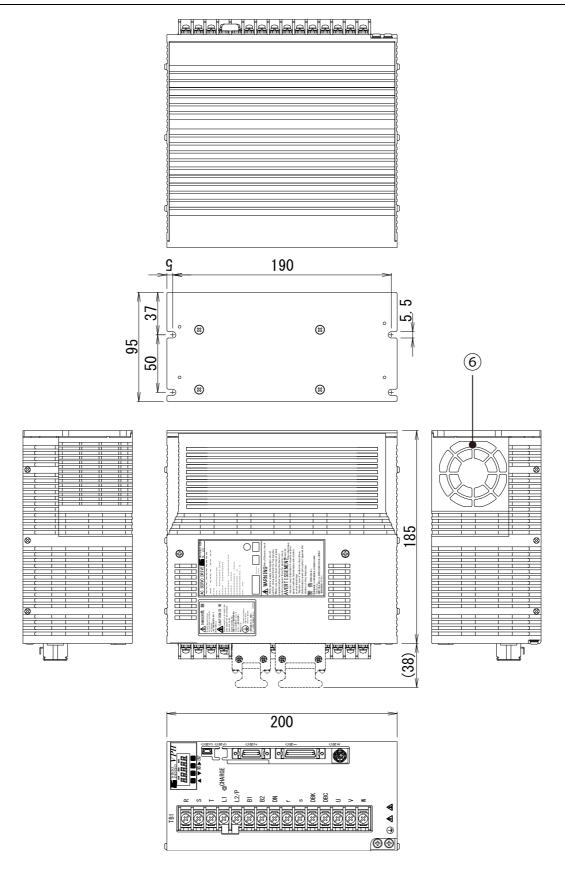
Outline drawing of the main unit of the device with 1.5 kW or 2.2 kW (Type 3)
